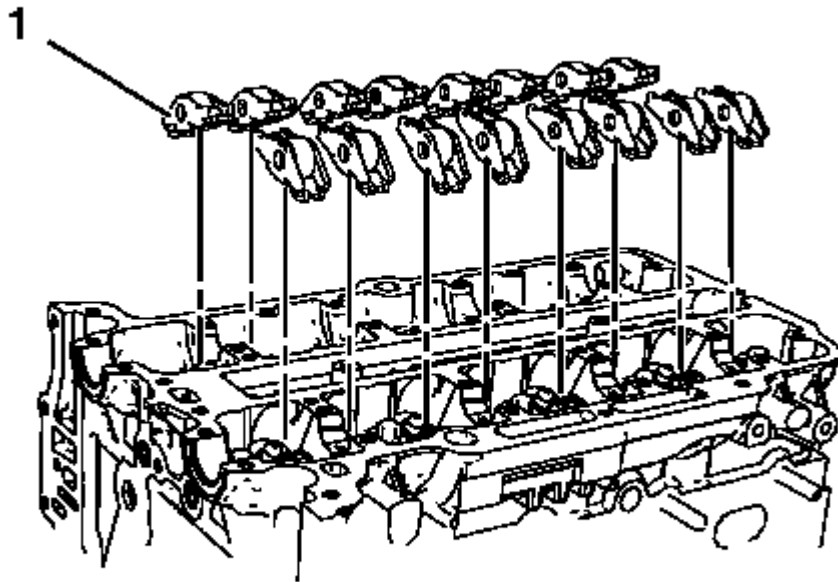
Hydraulic Valve Lash Adjuster Arms
